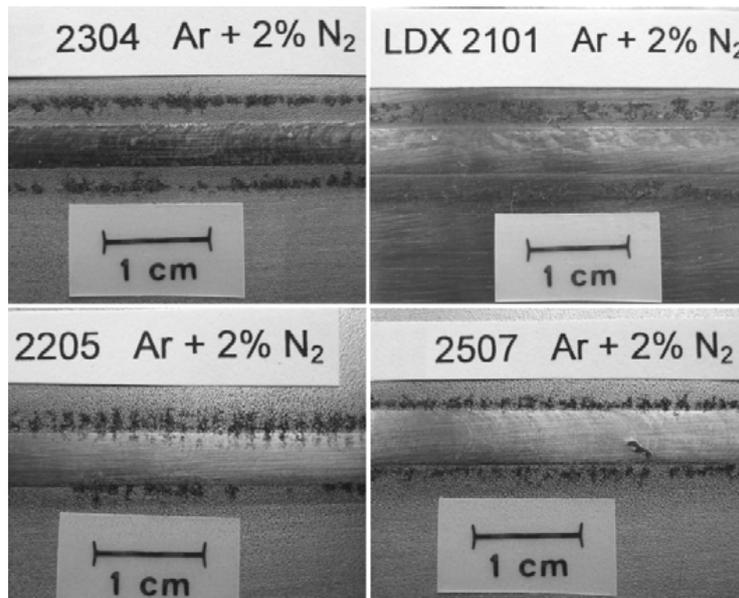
Weld discoloration after the wet paper corrosion test
